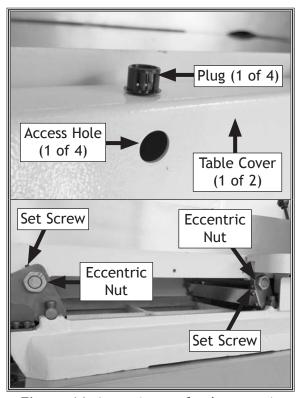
Accessing outfeed eccentric bushings (2 of 4).
